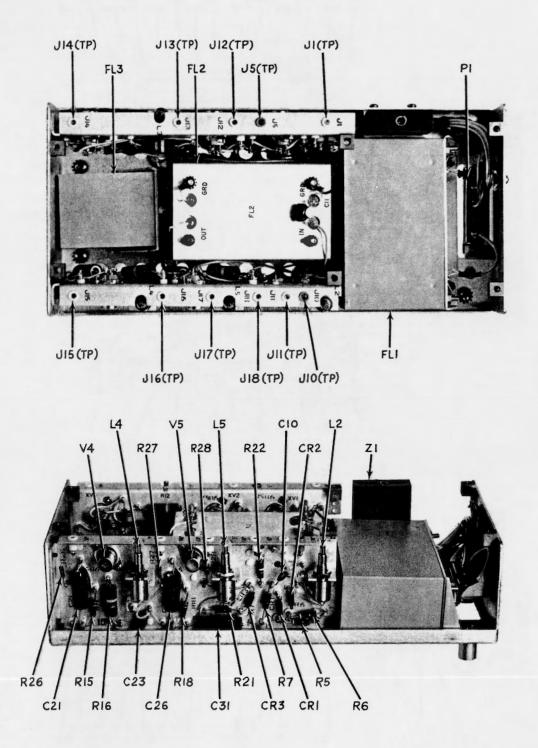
2nd Injector (B) A1A11, Parts Location and Test Points
